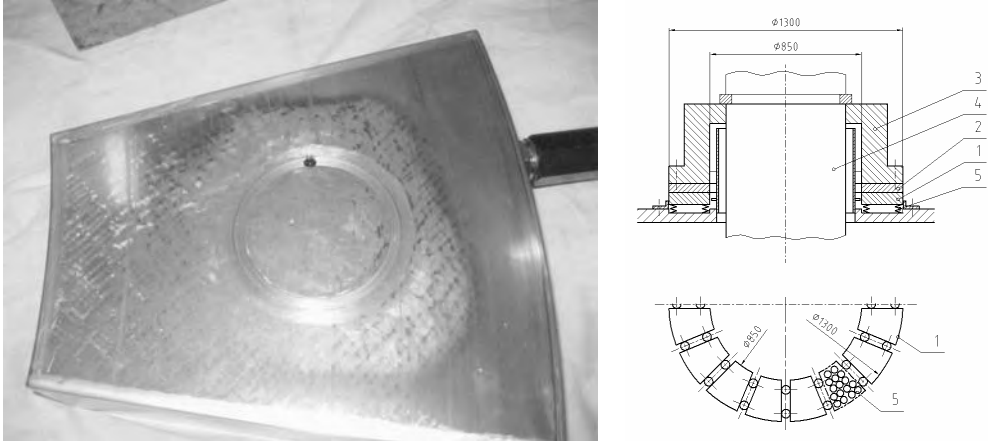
Hydro generator thrust bearing. a) photo – excessive surface wear due to metallic contact (failure) visible; b) spring support scheme: 1 – bearing pad, 2 – slide ring, 3 – flanged bushing, 4 – generator shaft, 5 – set of supporting springs
